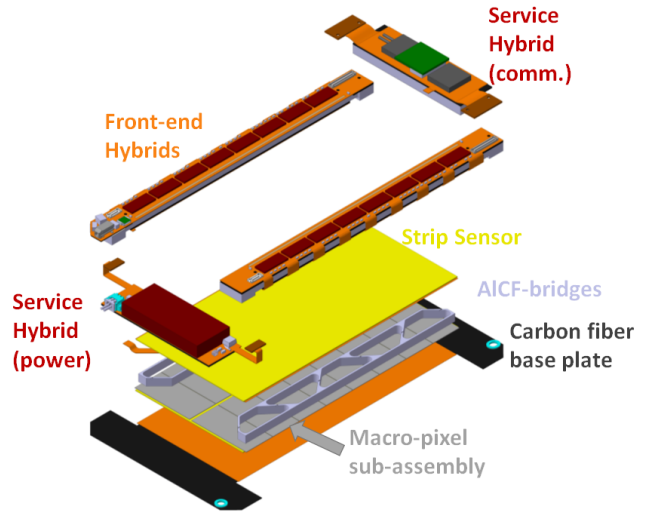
Drawing of the PS module type. Shown is the exploded view of parts as they need to be assembled at the module assembly sites. Adapted from [5].
